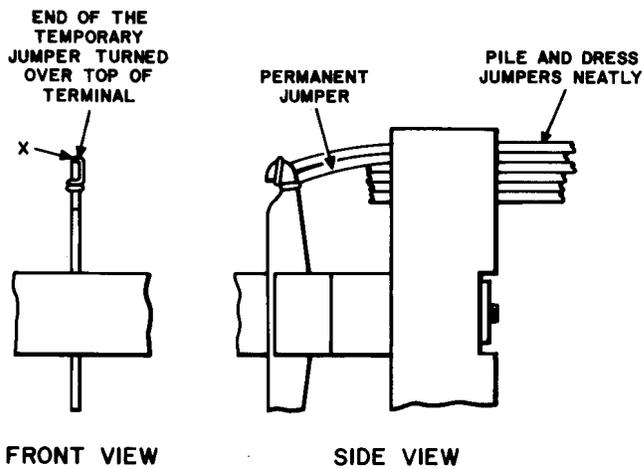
Temporary Cross-Connections on 35- or Similar-Type Terminal Strip Without Back Notch Terminals
